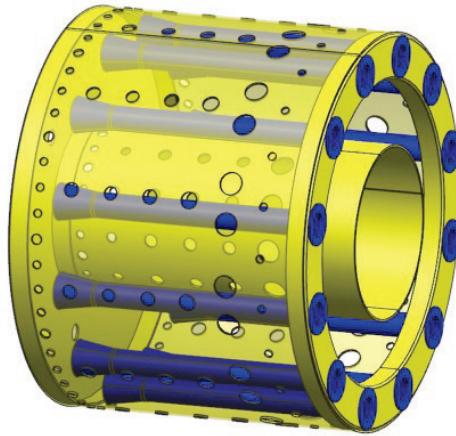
CAD model of the combustion chamber of the GTM120 turbine engine
